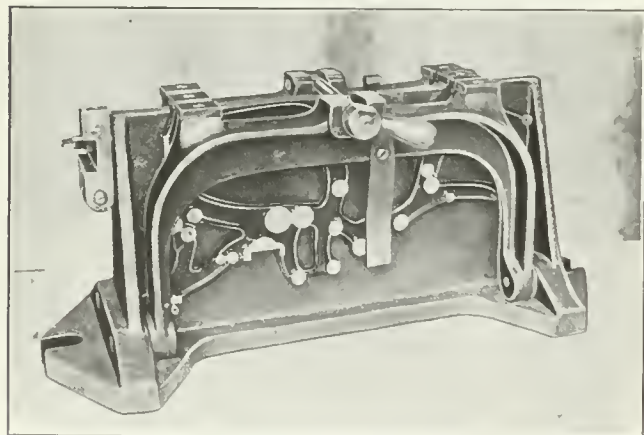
Double Knee Fixture for Milling the Foot Surfaces of Two Side Frames simultaneously
